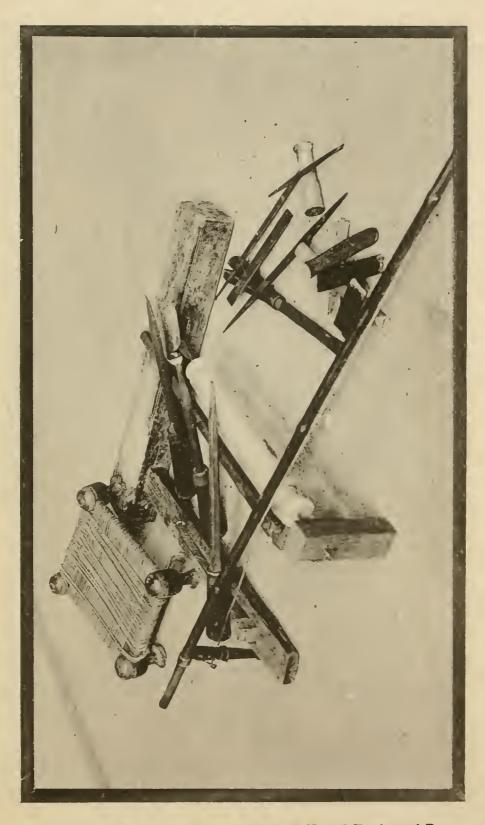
Indian Turning Lathe with Kit of Tools and Bow.
